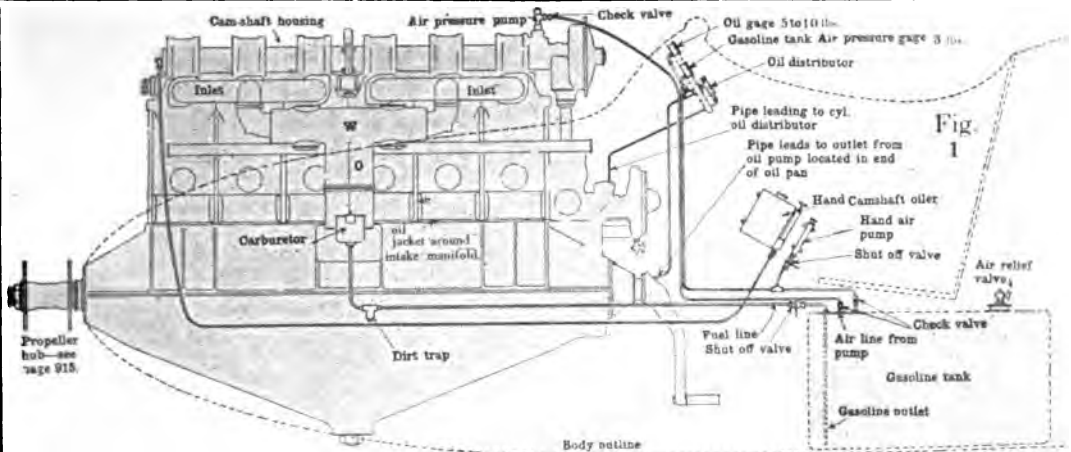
Illustration showing the engine installation of the Hall-Scott, type A-5, 125 h. p. six cylinder engine. Also the gasoline system and auxiliary cam shaft oiling system. Note gasoline air pressure pump is operated by cam shaft. There is also an auxiliary hand air pump. The air pressure (not under 8 lbs) forces the gasoline through gasoline outlet pipe to carburetor. On some systems another small auxiliary tank is provided above carburetor, about 2 feet, to which the gasoline is forced by air pressure and then the gasoline is fed to carburetor by gravity. Note the auxiliary hand lubricator for cam-shaft. A water jacket (W) surrounds the inlet manifold to heat the mixture per page 157. The lubricating oil circulates around inlet pipe in jacket (OJ), see page 915.
